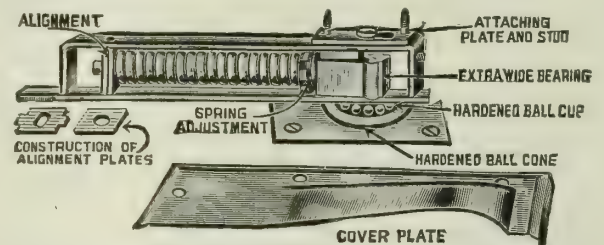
Side Plate Removed, Showing Working Parts of Hinge "SHELBY CHIEF" DOUBLE ACTING, BALL BEARING FLOOR HINGE.
